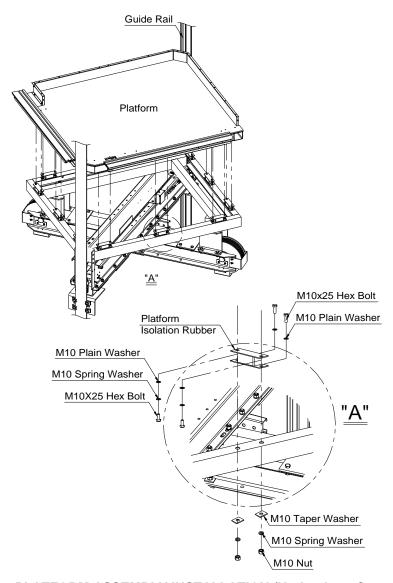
PLATFORM ASSEMBLY INSTALLATION (Underslung Corner post type)
